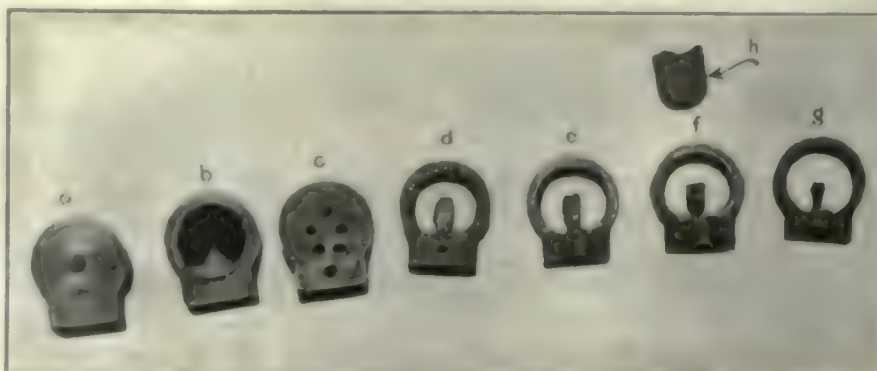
PROGRESSIVE OPERATIONS ON PART SHOWN IN FIG. 3
